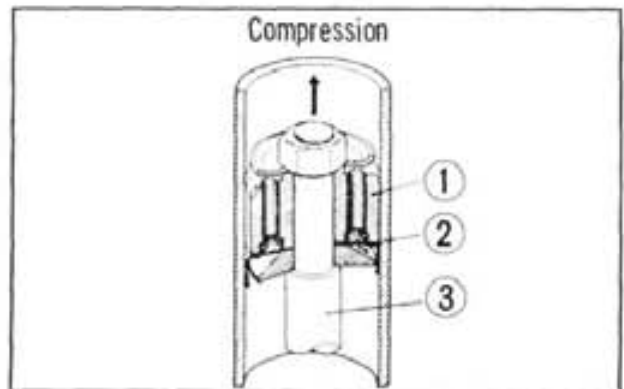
① Piston ② Valve ③ Rod
